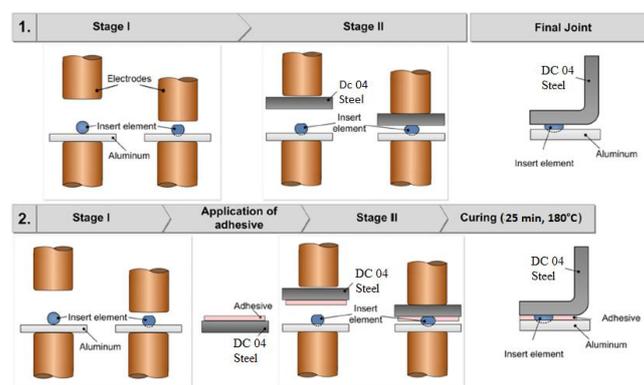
Hybrid projection welding process with an insert element without (1.) and with adhesive bonding (2.) with two main stages I- securing of element on aluminium sheet; stage II- manufacturing of final joint.
